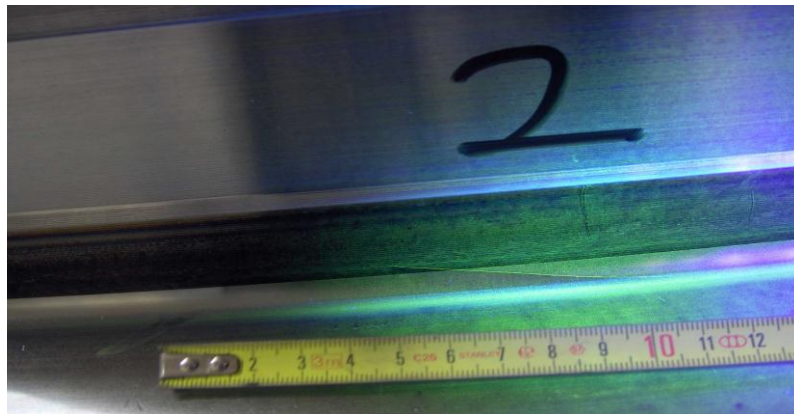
Crack indication in blade shafts for industrial fans for a power plant
